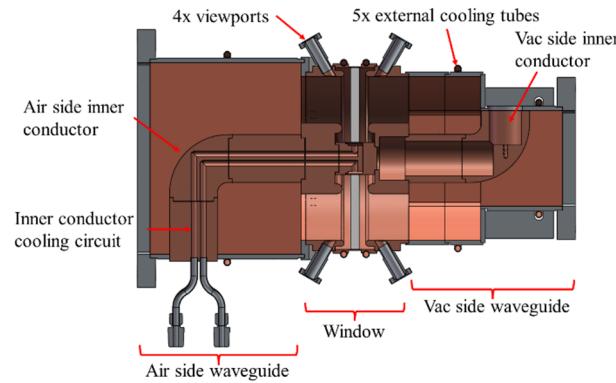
Cross-section view highlighting major sub-assemblies and components.
